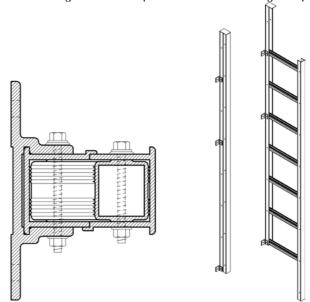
Cross section of closed ladder. When closed the dimensions are 72 mm x 47 mm. When open the dimensions are 398 mm x 47 mm. The rung width is 311 mm, the rung distance is 300 mm.
